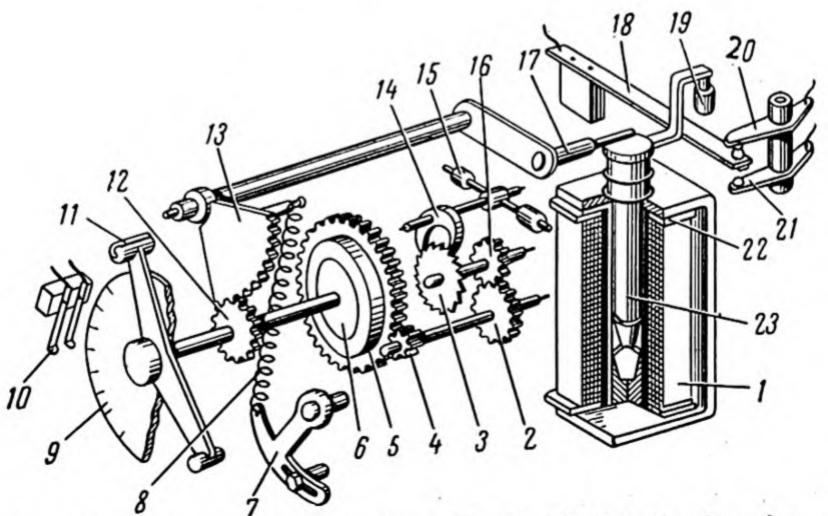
Diagram of the parts of type 3B-122 (EV-122) time-lag relay.
